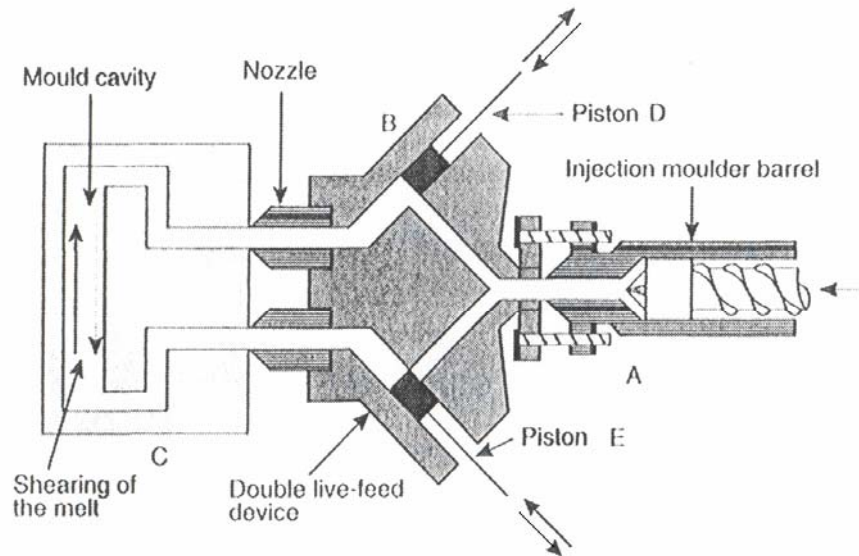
One embodiment of SCORIM where the device (B) for producing shear during solidification, by the action of pistons (D) and (E), is placed between the injection moulding machine barrel (A) and the mould (C)
